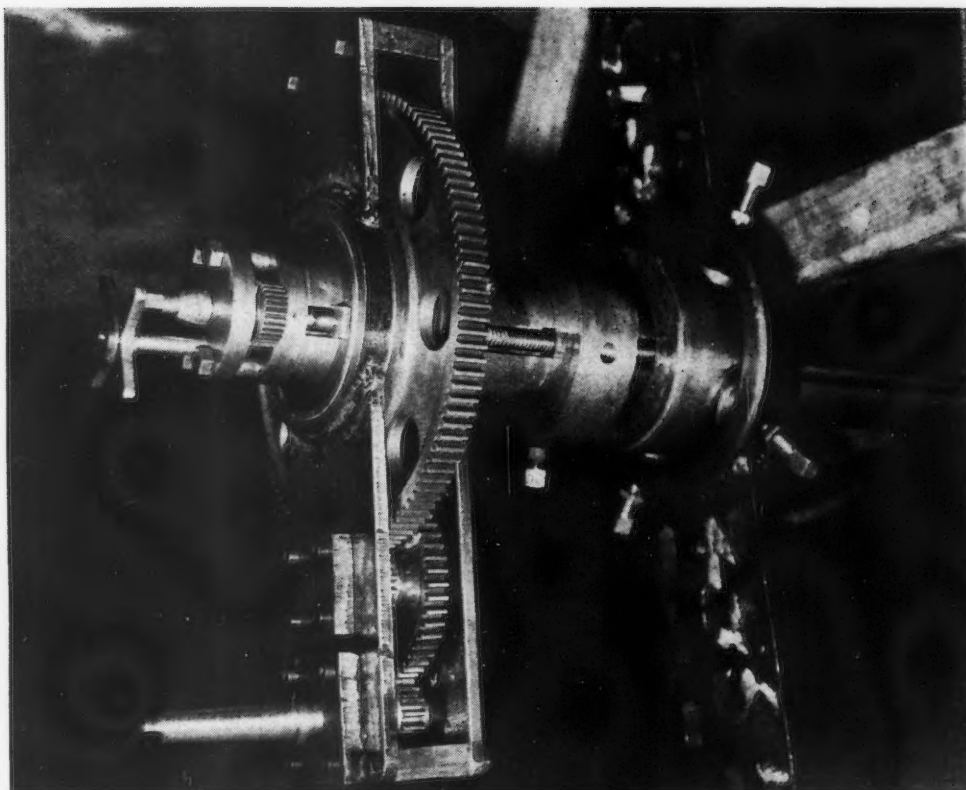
Circle cutter provides a smooth cut edge with close tolerance through a full-floating torch. No wheel or guide touches the material being cut. The motor drive is through worm gears, and the torch arm is carried on thrust bearings keeping the cut edge smooth. The cutter weighs approximately 10 lb and will cut circles of from 6 to 60 in. diameter.
